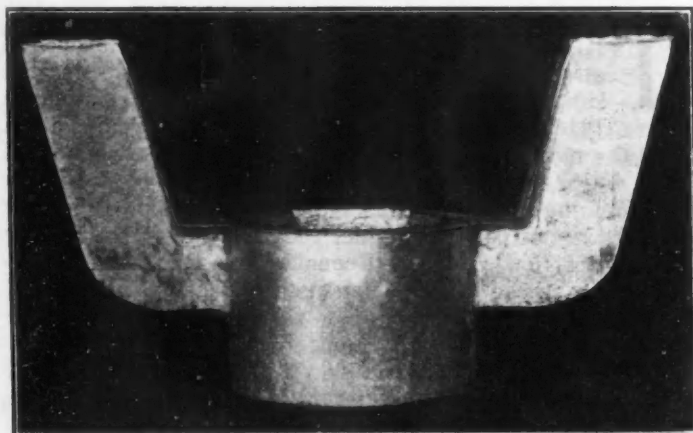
RADIAL-ENGINE PISTON CASTING THAT WAS POURED DIRECTLY INTO THE RISER
